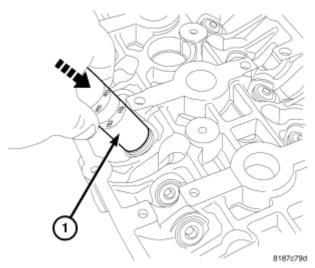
Valve Keeper Tool Courtesy of CHRYSLER LLC
